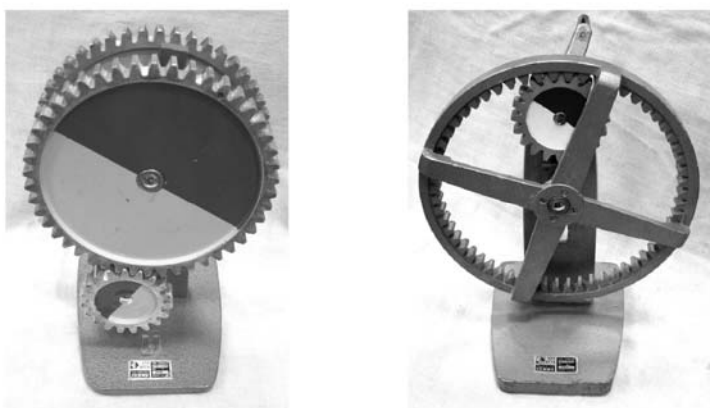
Models of mechanisms by SojuzVuzPribor: a planetary mechanism with external gearings and a tooth gearing with internal gearing
